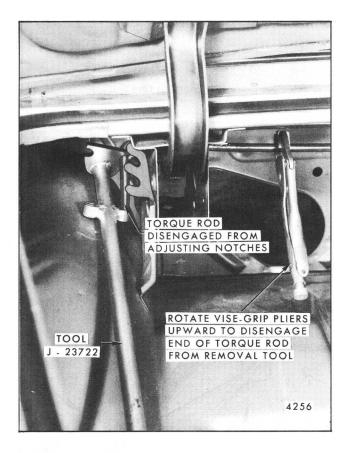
Rear Compartment Torque Rod Removal - Cadillac "C-E" and Buick "E" Styles
